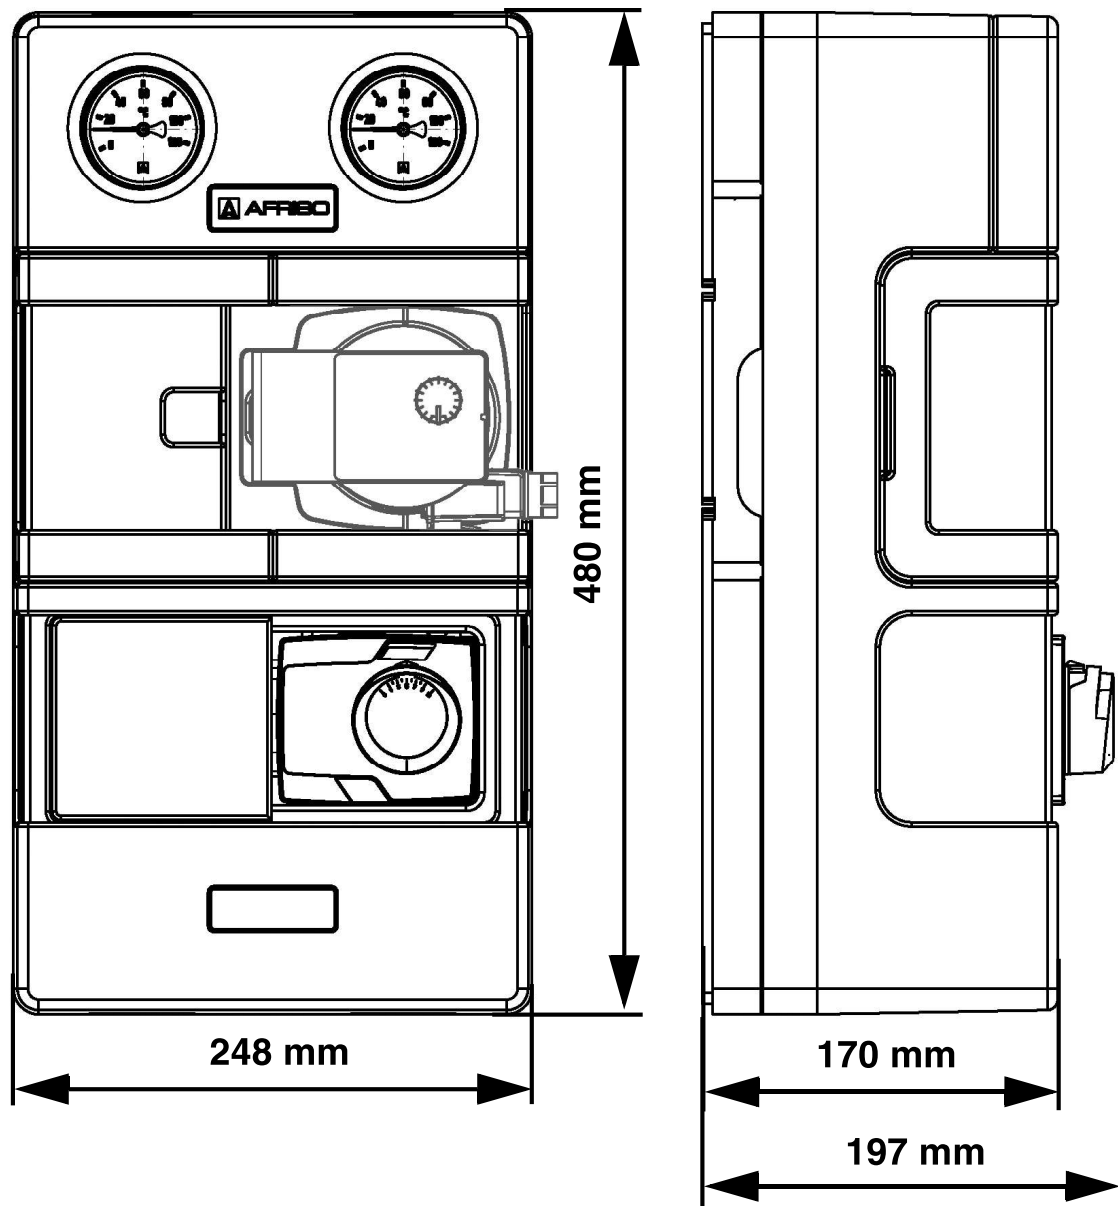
Dimensions PrimoTherm® K 180-1 and K 180-2 (with mixer)
